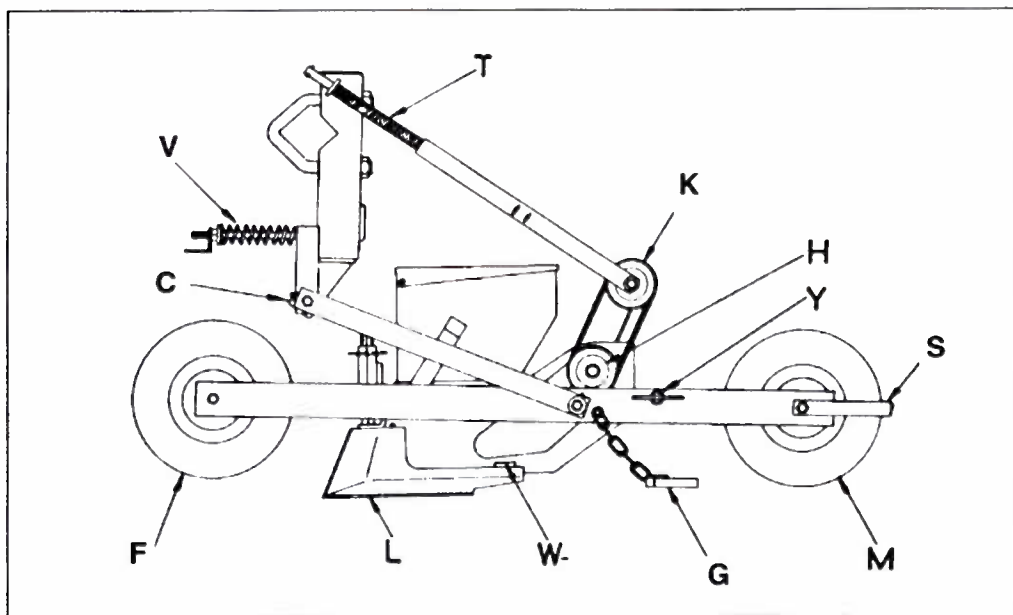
Stanhay® precision seeder (chassis with coulter and knee joint assembly)
